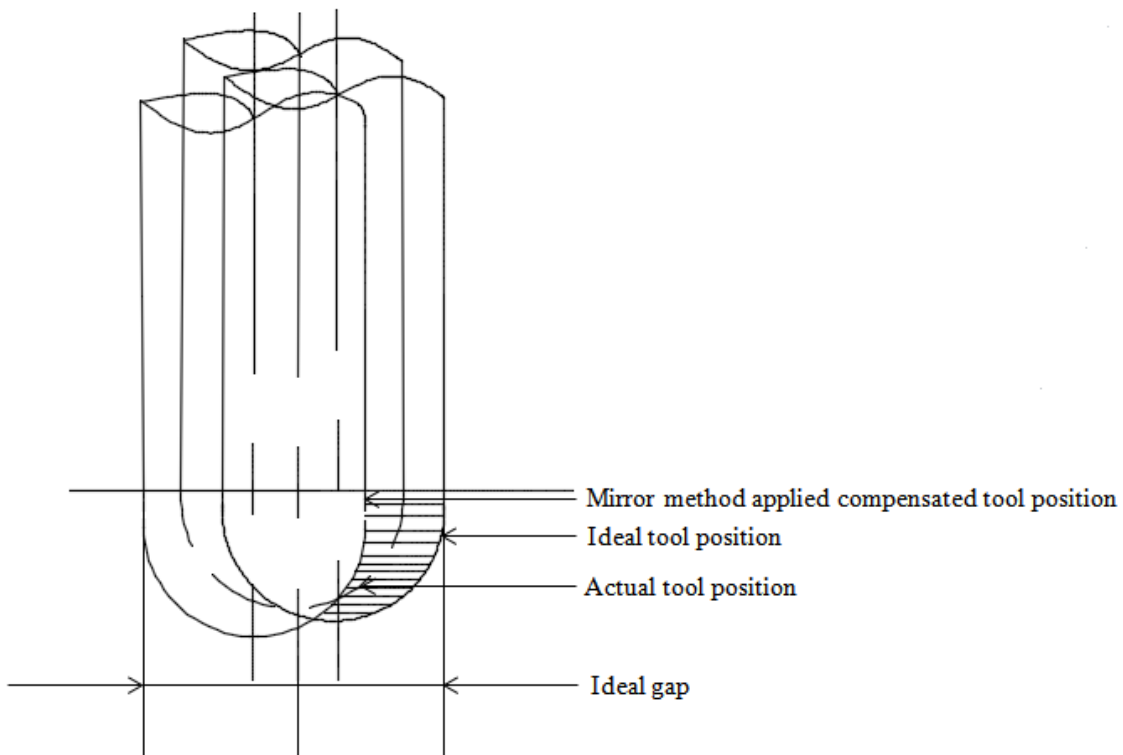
Demonstration of ideal gap in case of ball-end milling cutter with compensated toolpath
